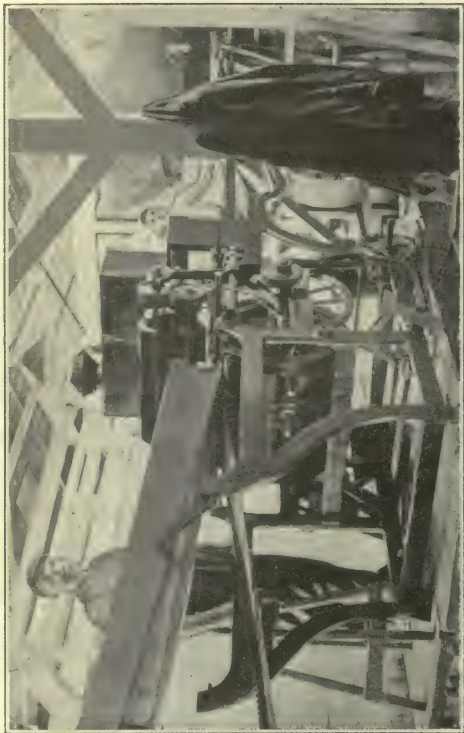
The Lacquering Machine where the Sheets of Tin are Varnished after being Printed.
